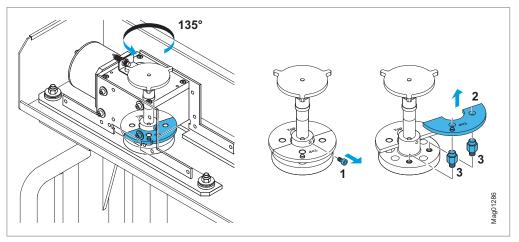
Removing the hold-down screw, locking disc and centring bolt
